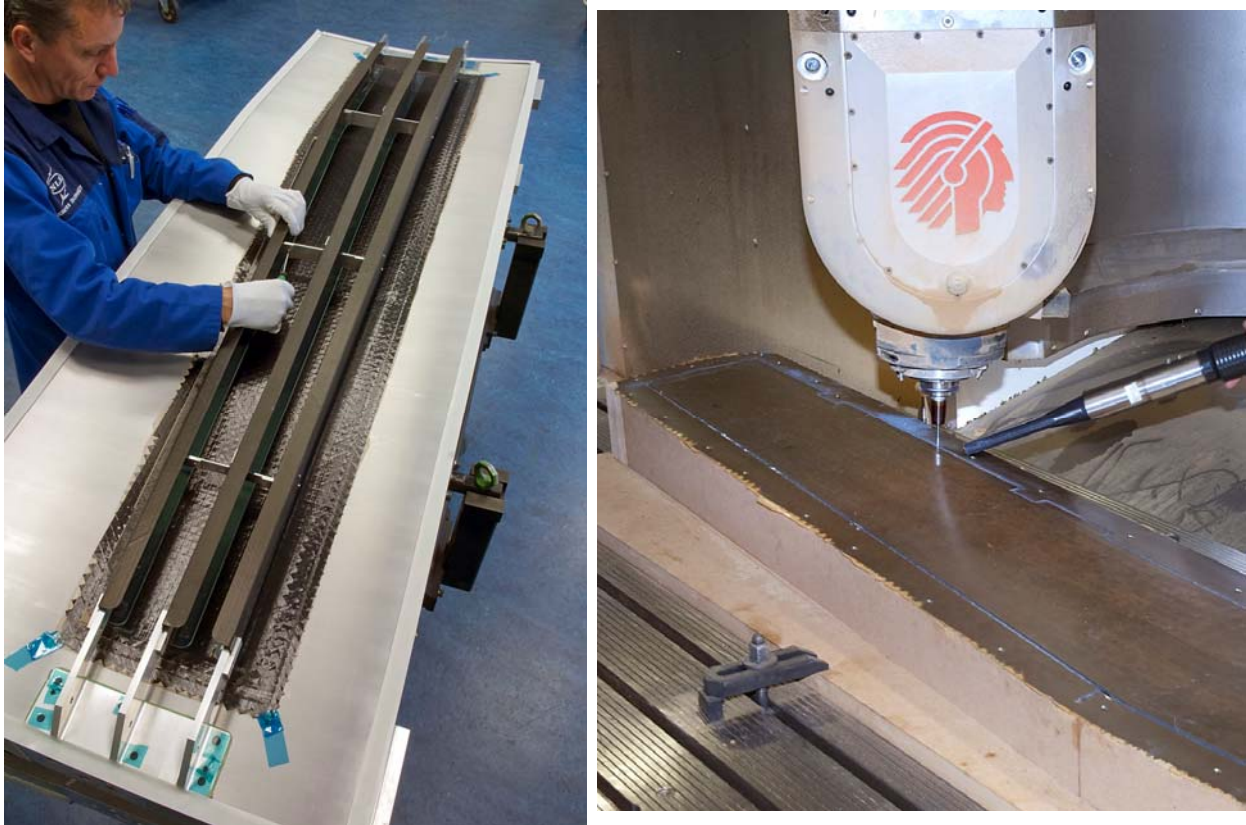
Spars installed on lower skin to be co-bonded and machining of the co-bond
